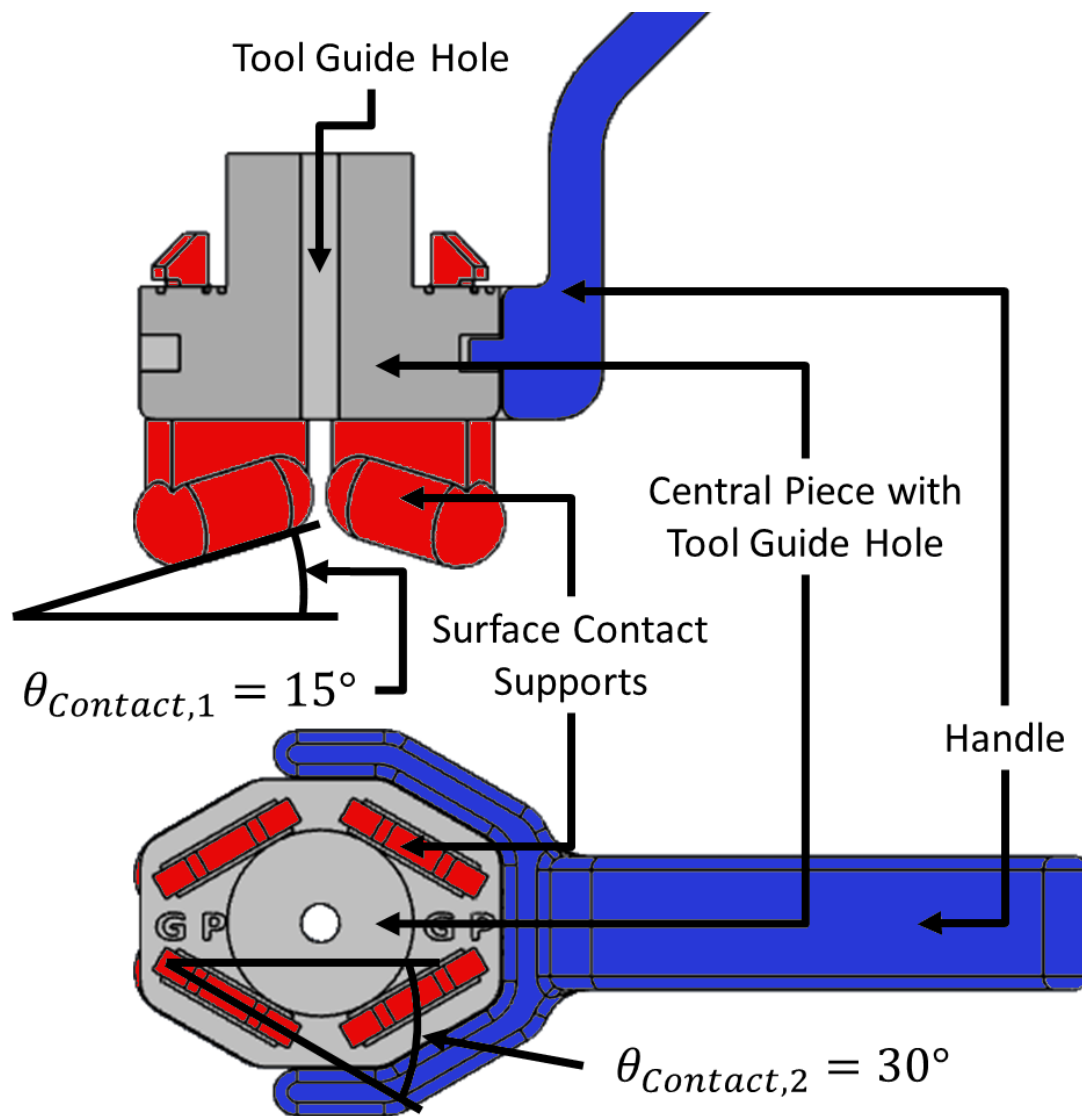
A technical illustration showing the surgical guide design, including labels for each part and angles of the contact pieces (shown as surface contact supports).
